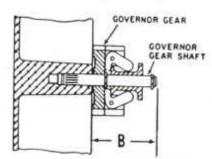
View showing installation of governor shaft and governor gear and weight assembly on Models HH80, HH100 and HH120. Dimension (B) is 1 inch (25.4 mm).
